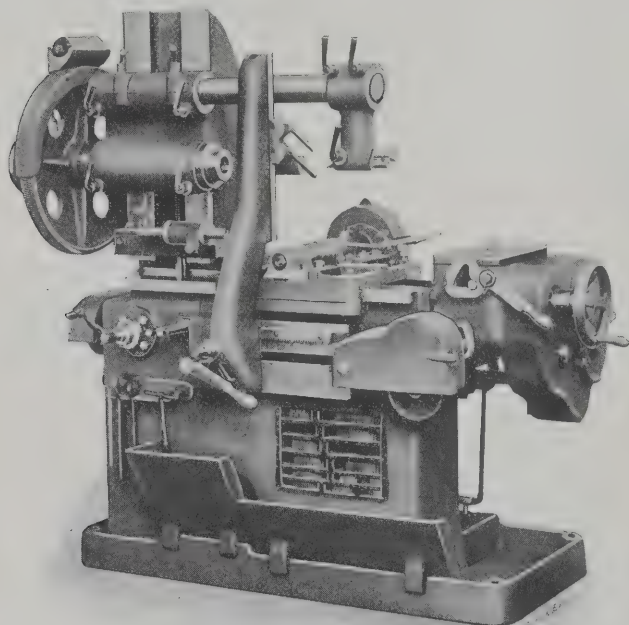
A New Cincinnati Gear-cutting Machine, of a size well adapted to Automobile Work
